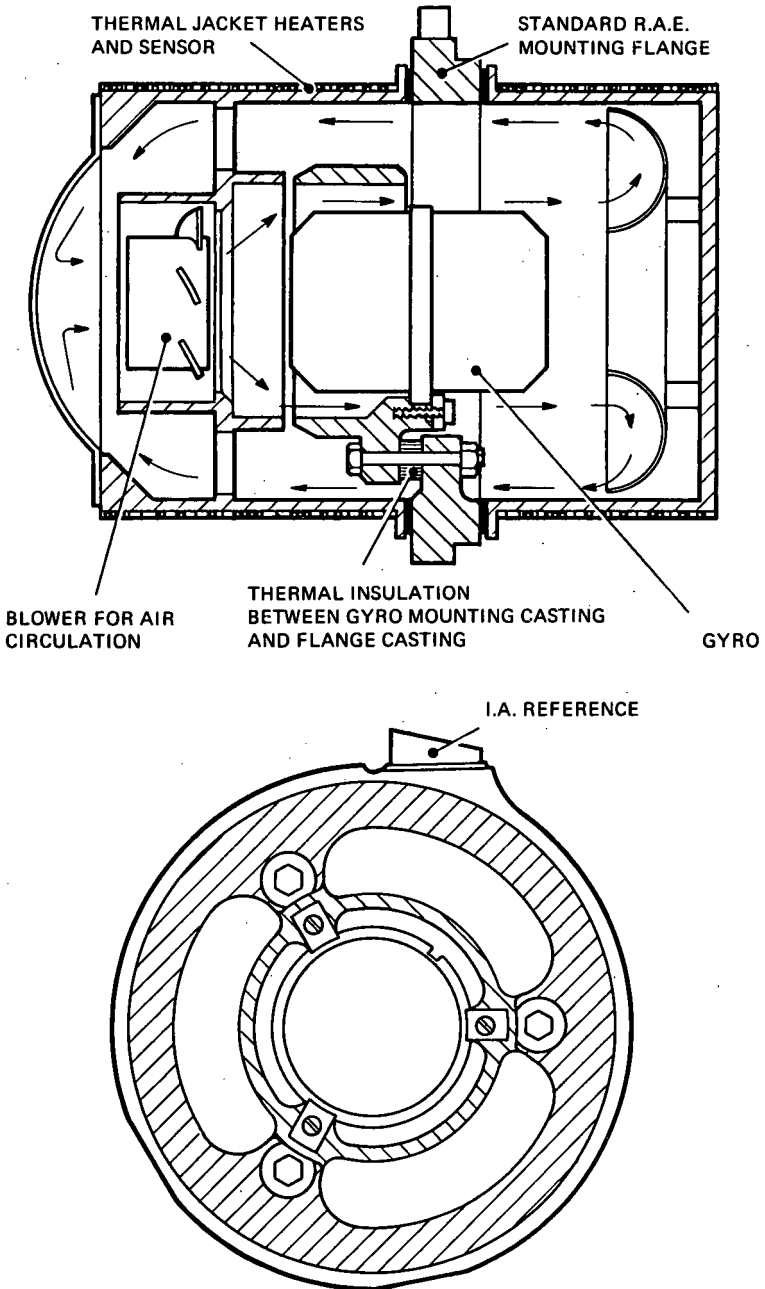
Thermal jacket for test purposes typical central flange mounted gyro
